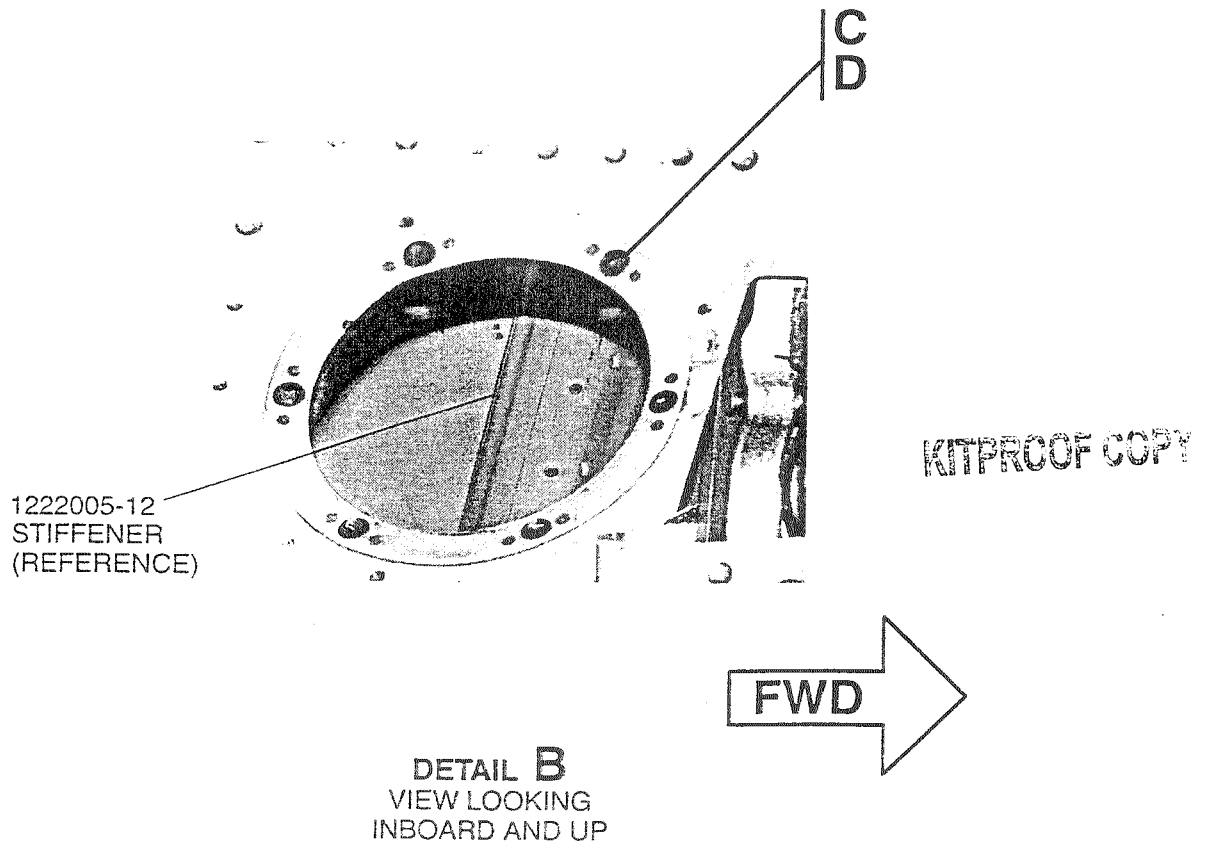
Wing Spar Cap Inspection (Sheet 2)
